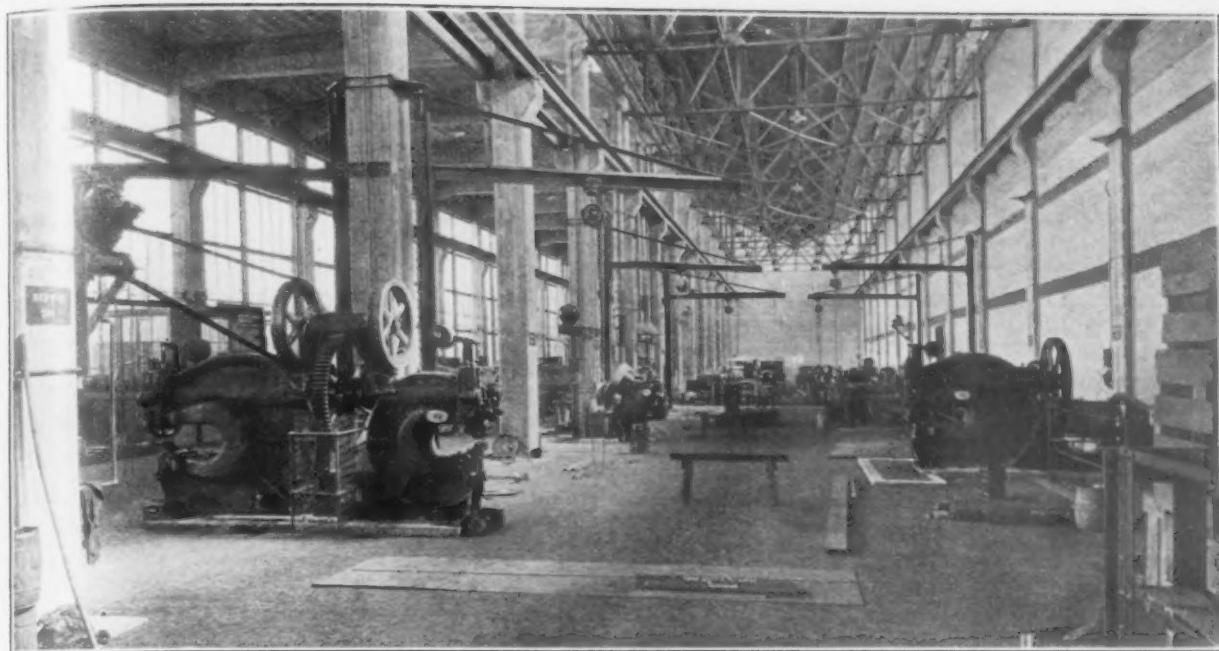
Looking East Through Center Bay of Plant, Showing the Plate Department. Simple but very substantial and neat means of suspending jib cranes are provided at nearly every column as is well shown in this view.
